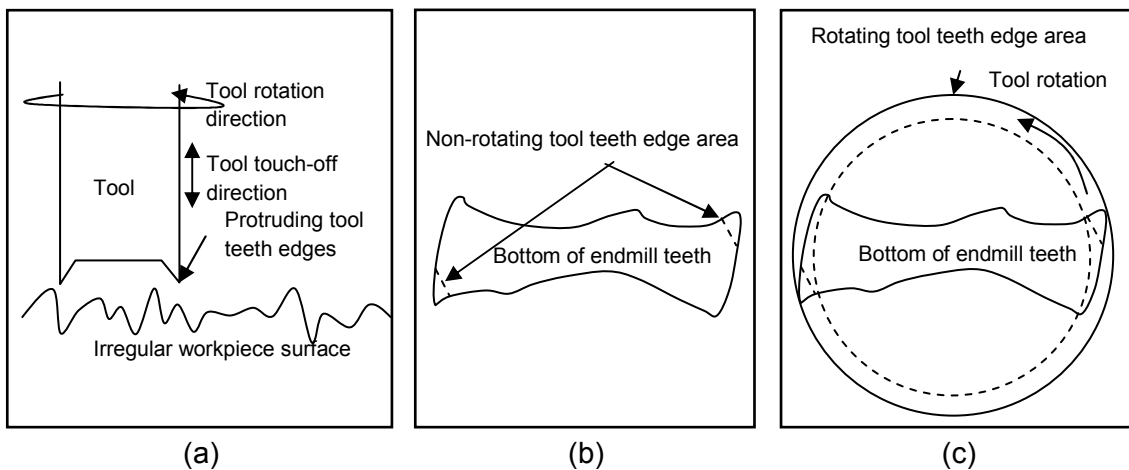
(a) Tool and workpiece surface geometries (b) non-rotating tool potential initial contact area (c) rotating tool potential initial contact area
